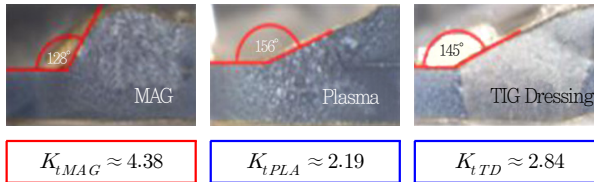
$K_t$  values and shape for various welding methods
